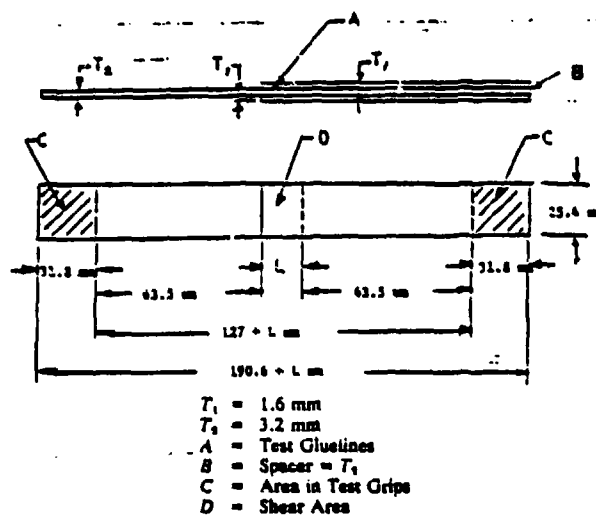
Form and Dimensions of Specimen for Double Lap Shear Test.
